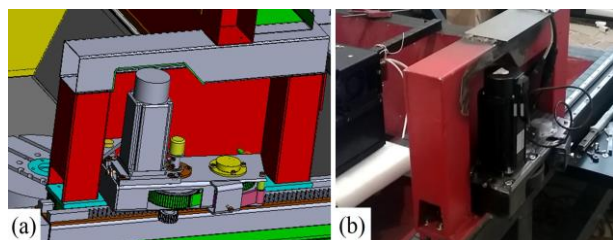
Installation of the gearbox on the machine portal support: 3D-model (a) and external view of the gearbox mounted on a support (b)
